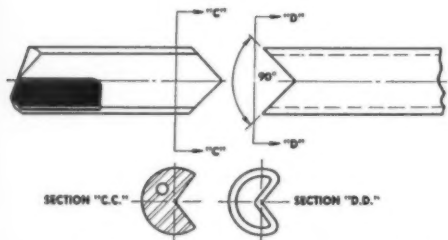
Second method of brazing carbide ends to drill tubes. Note shank end of drill end milled to a tongue shape with a 90° included angle.
